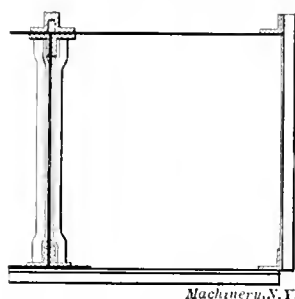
Section of Girder suitable for Light Cranes of Long Spans
